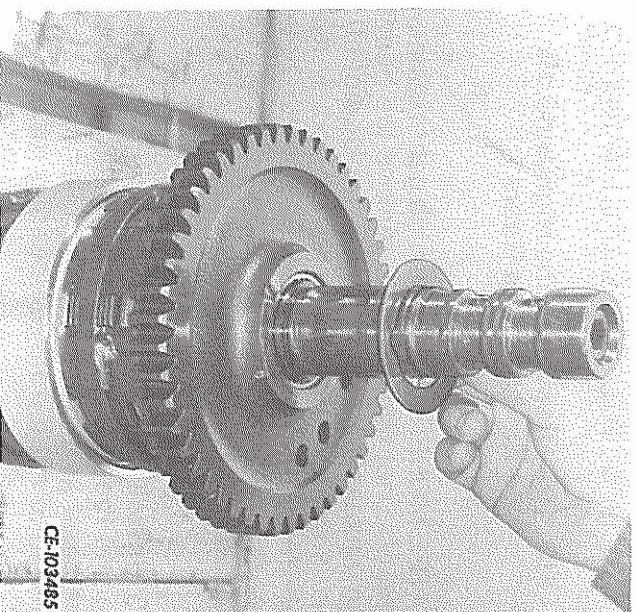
Removing the Second Speed Drive Gear Thrust Washer
